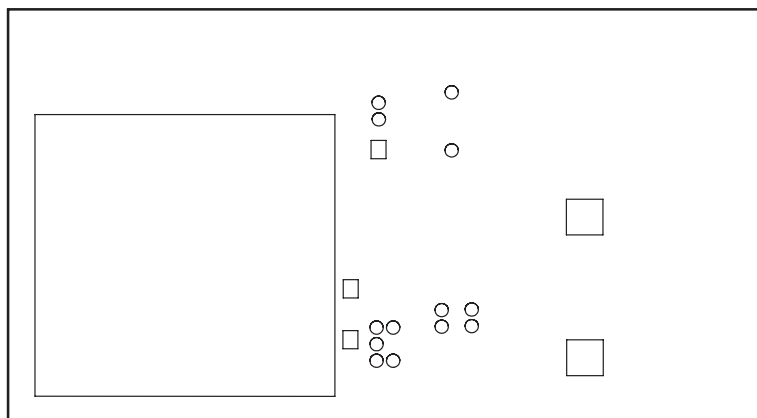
TRF1400 Test Circuit Board Solder Mask — Top Side
